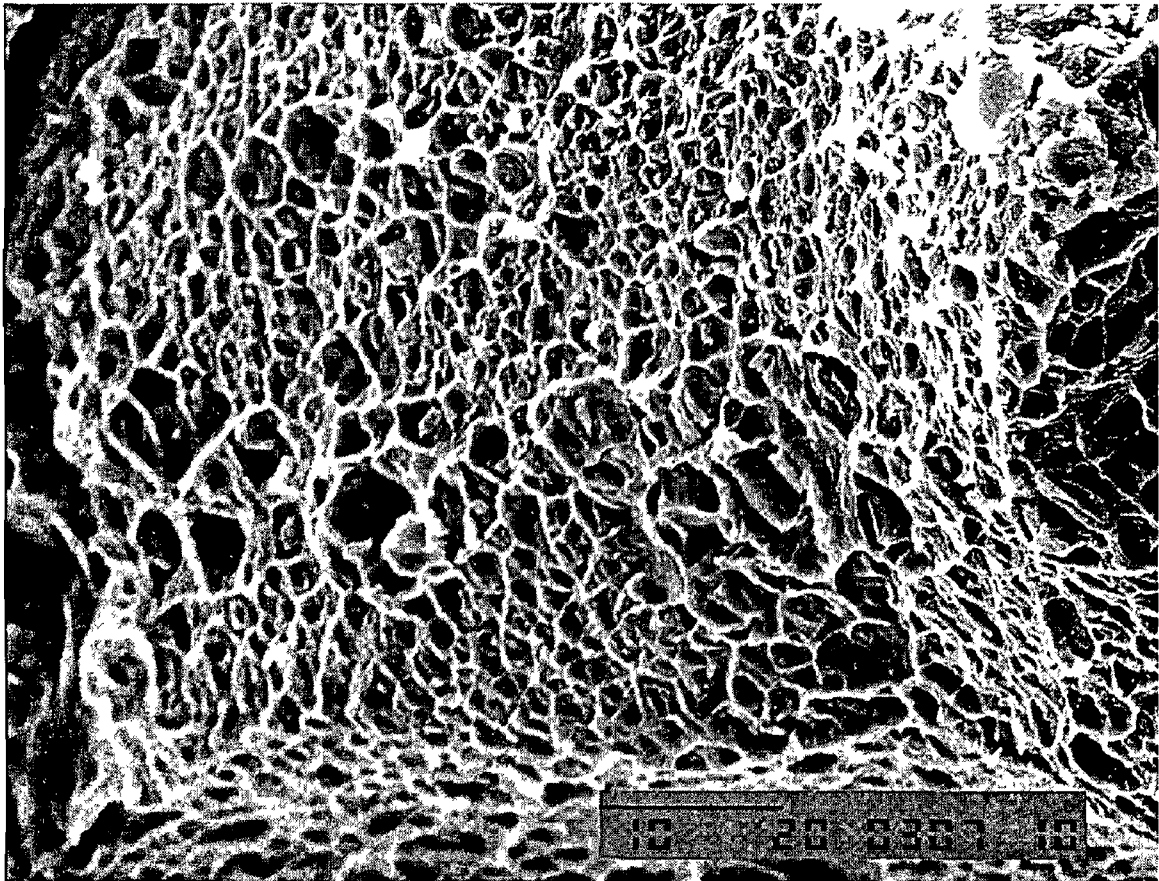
10a Fractured surface after fatigue test of one hour heat treated workpiece
